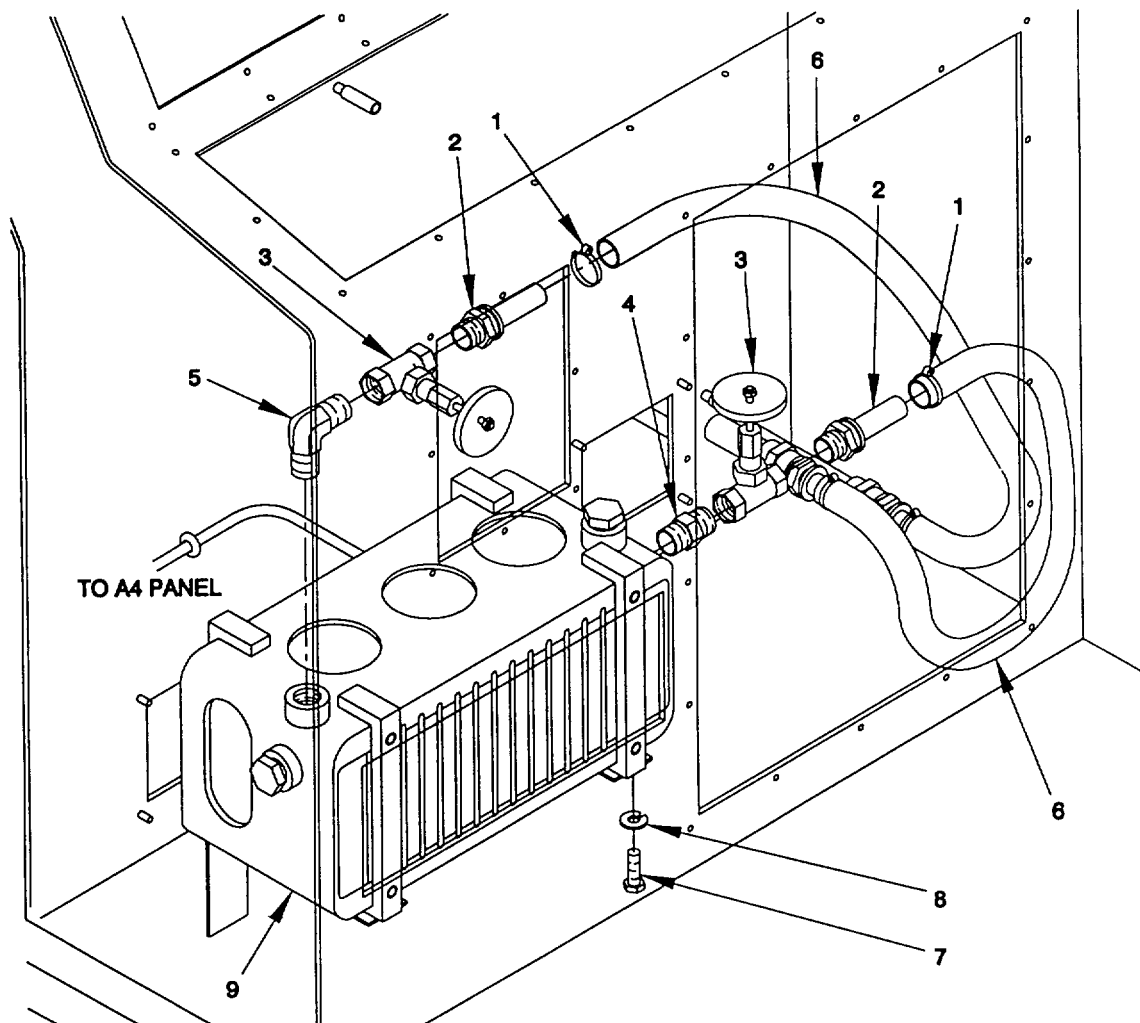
Heater and Heater Valve, Remove/Install (Sheet 1 of 2).
